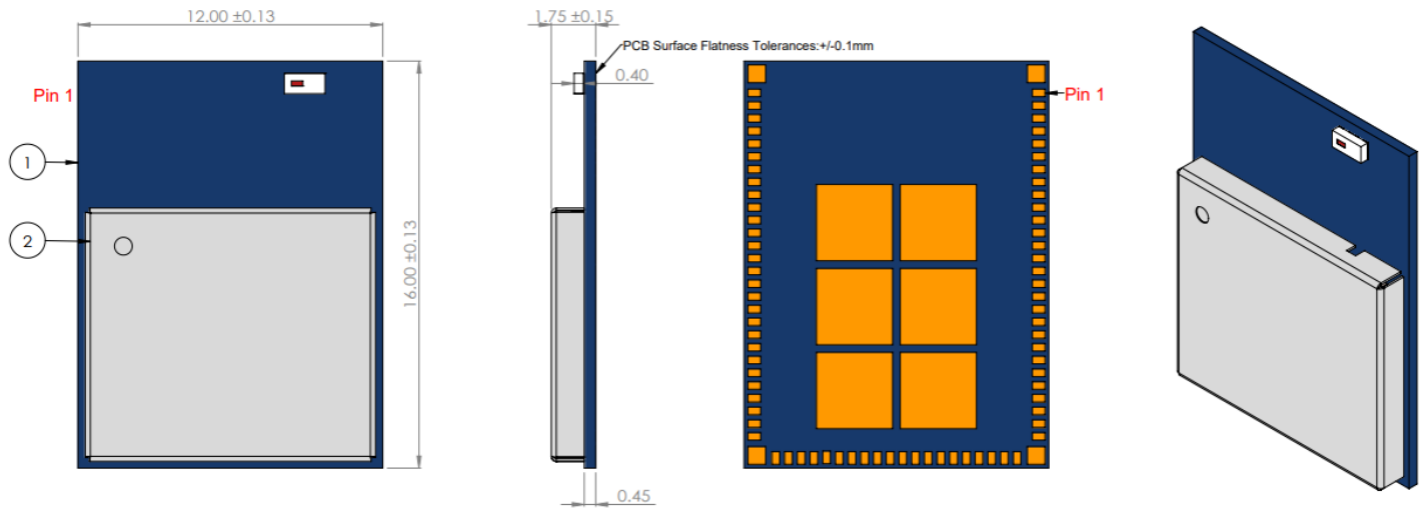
TI351 Integrated Chip Antenna Module Mechanical Drawing
